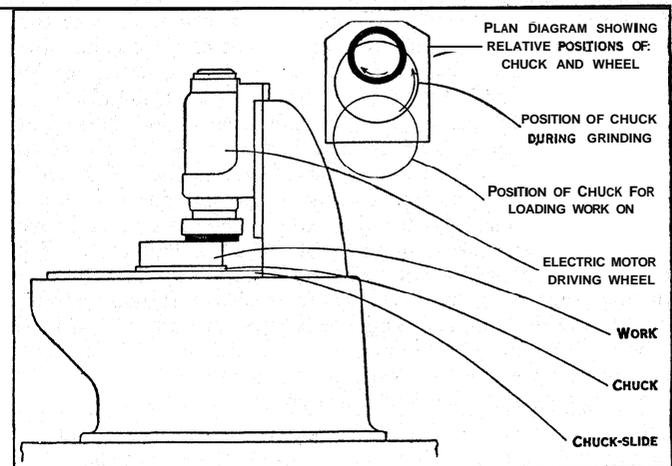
VERTICAL-SPINDLE ROTARY-TABLE SURFACE GRINDING MACHINE
